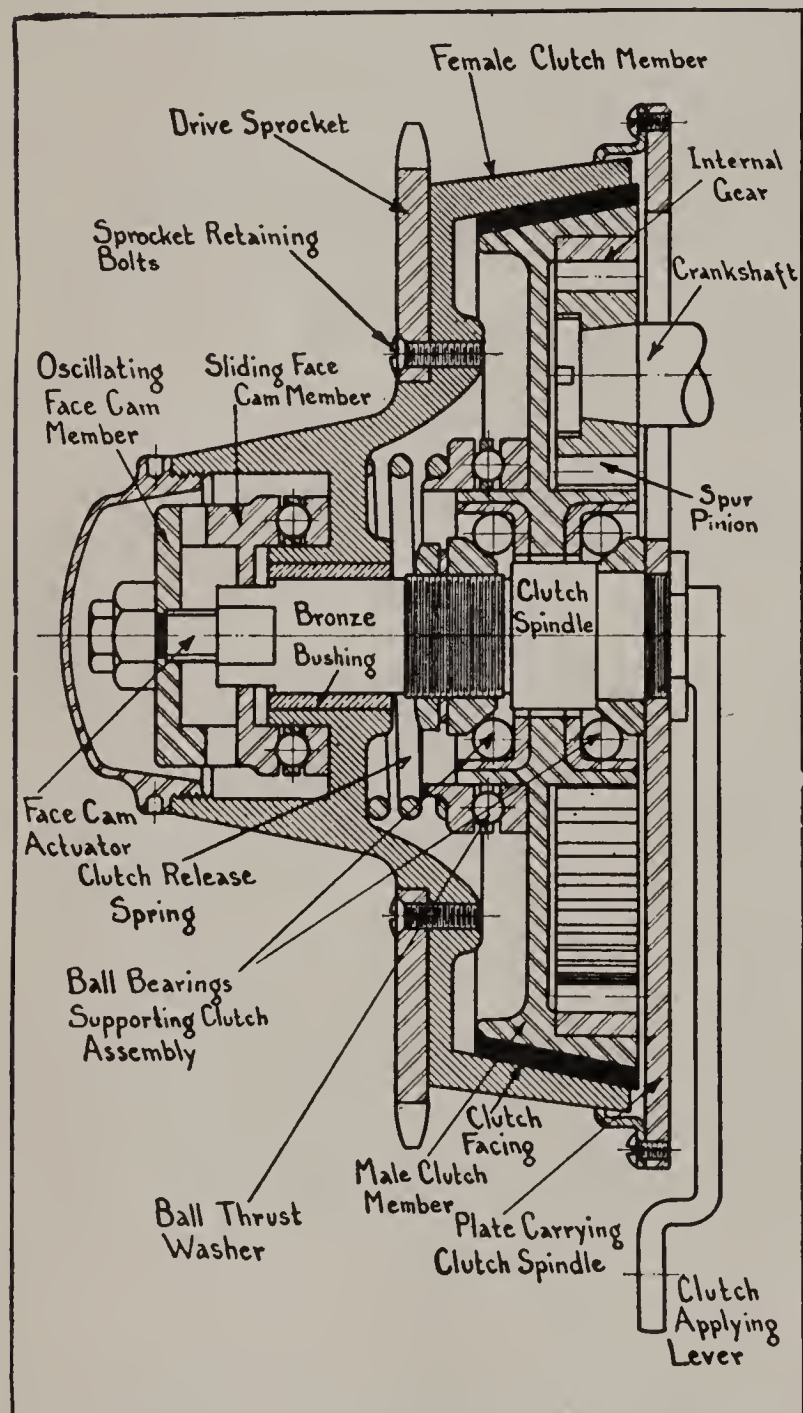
Sectional View of the Reading-Standard Cone Clutch.
